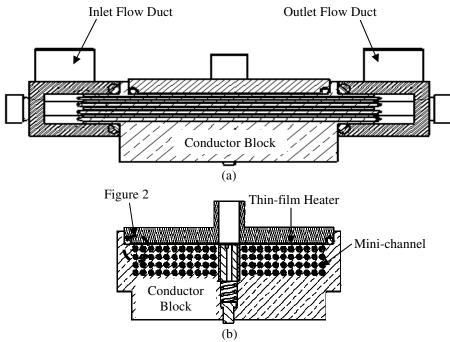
(a) Front View of TCU Design; (b) Side View of TCU Design
